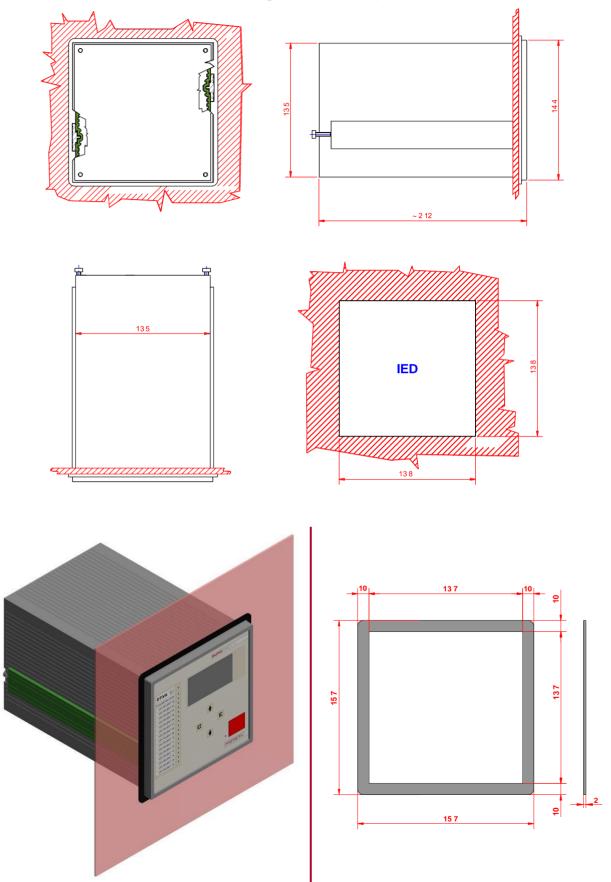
Dimensions for flush mounting of 24 HP panel instrument case with 3D illustration
